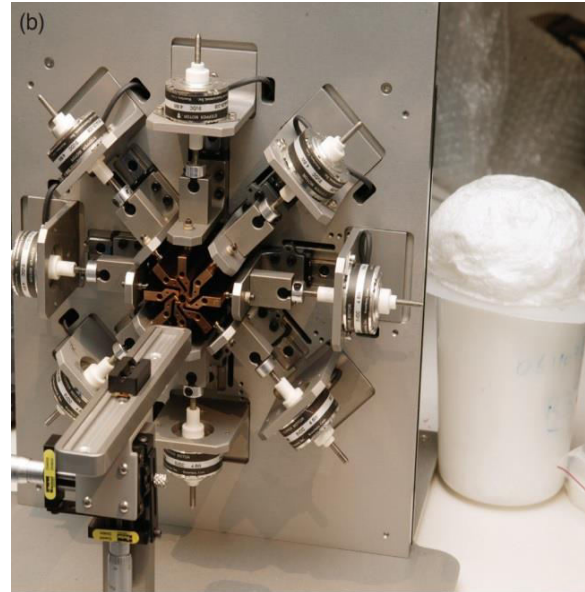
(b) An eight-blade cylindrical crimping machine with heated blades
